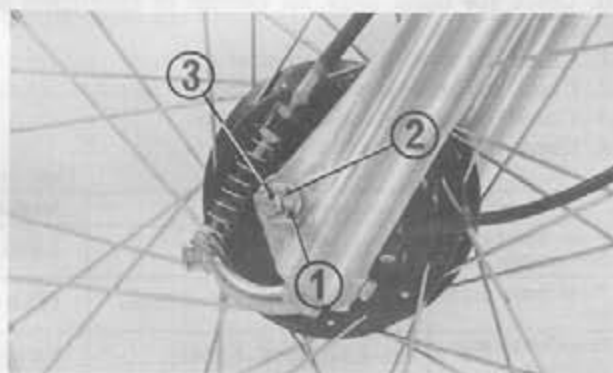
(1) Cotter pin (2) Axle nut (3) Front axle
